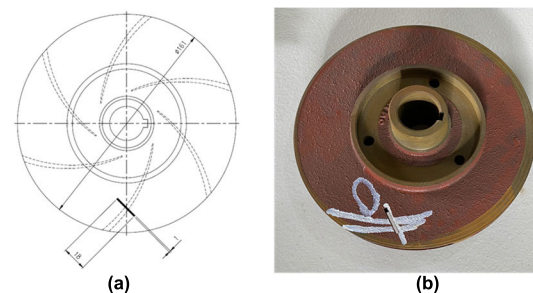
(a) Schematics of defective impeller (b) Defective impeller.
